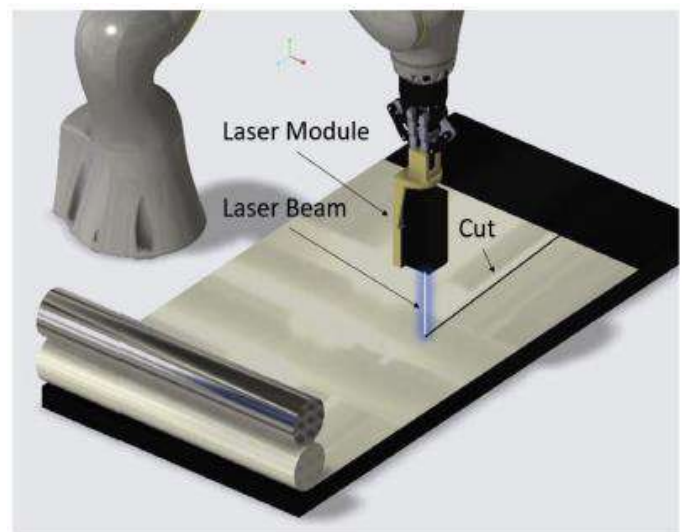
Illustration of automated laser cutting of a material sheet layer using a visible laser.
